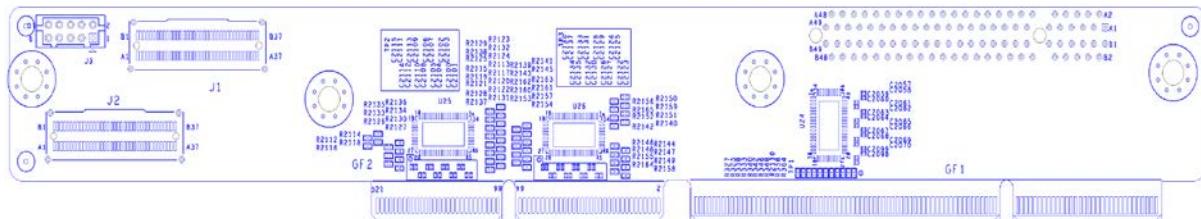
Bottom Side PCBA Placement of RC-PE1U14-TY
